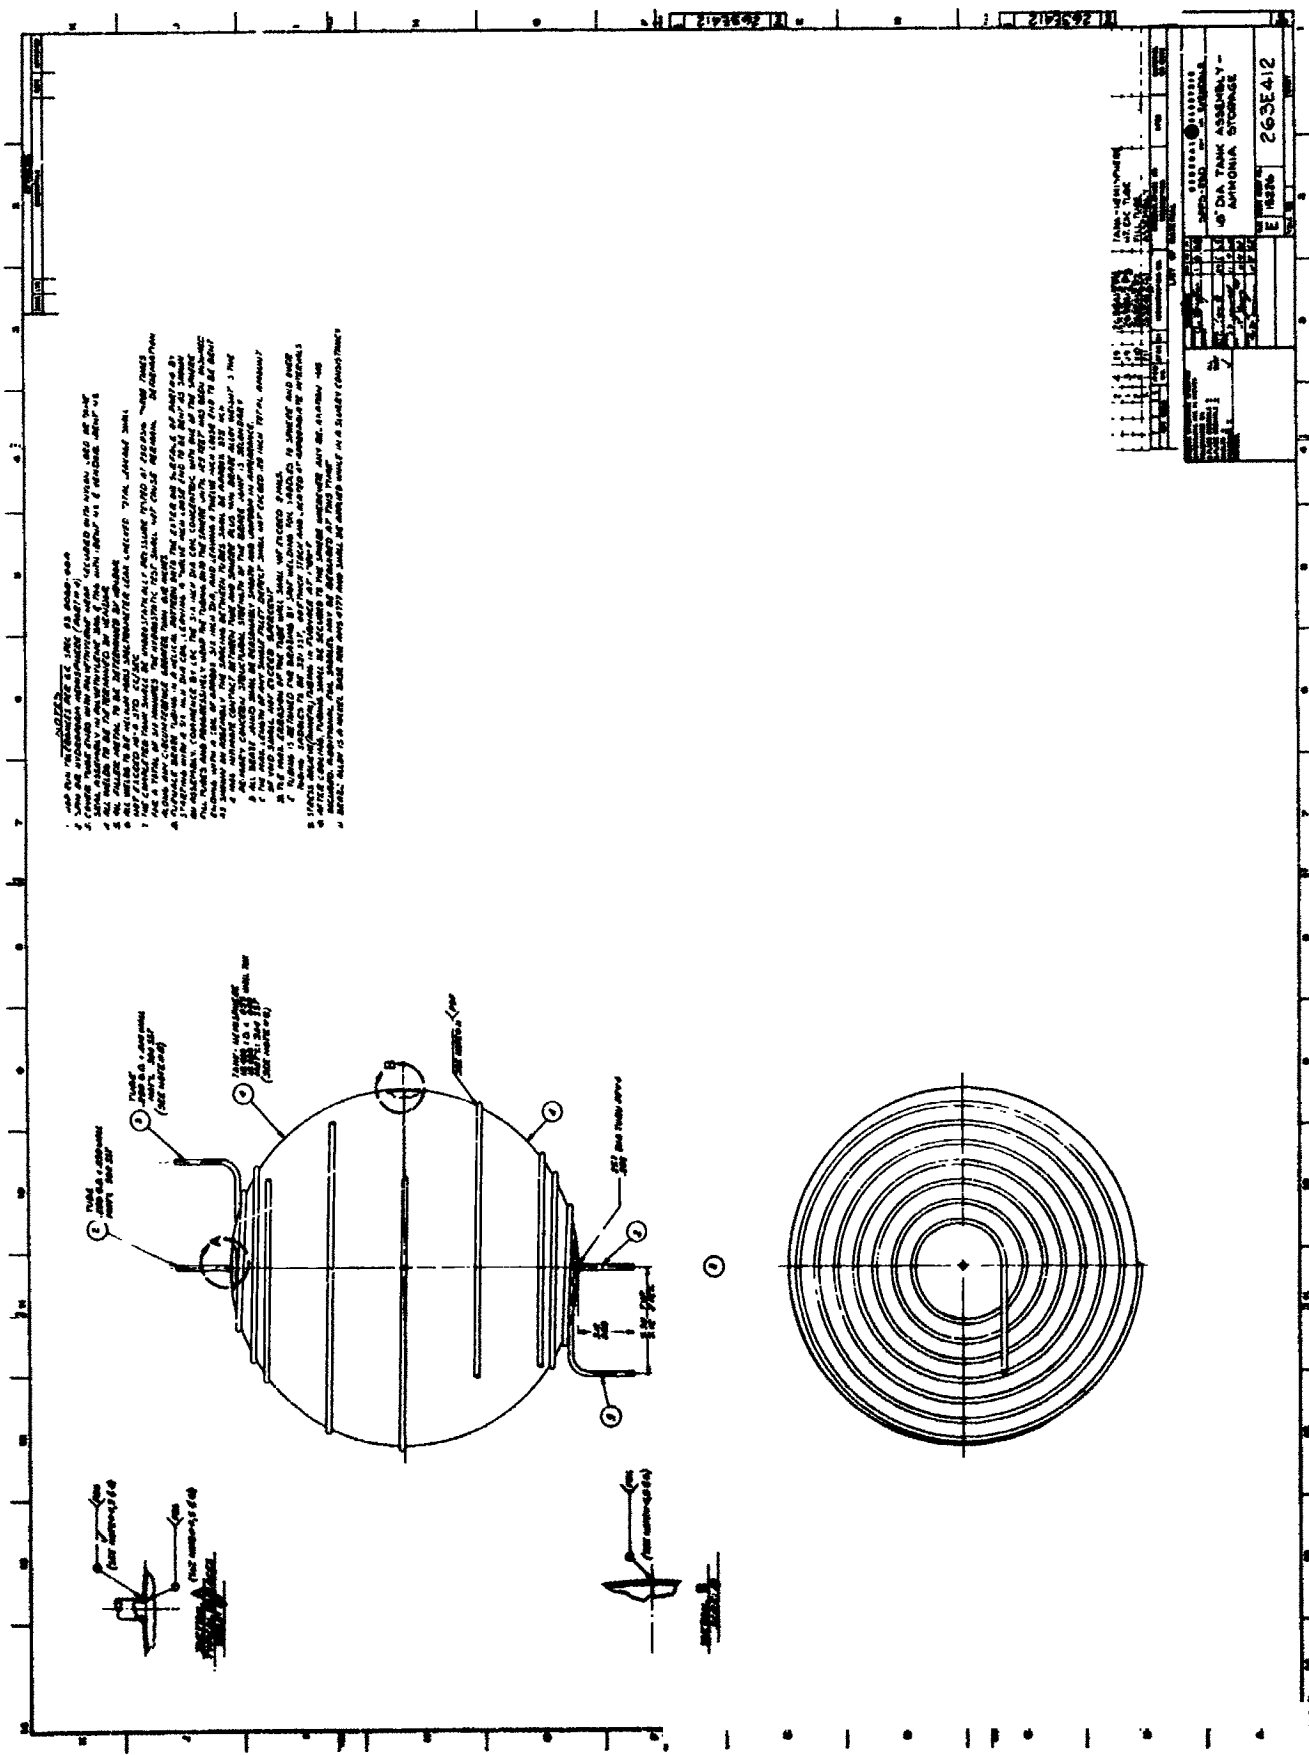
Engineering Drawing of Storage Tank/Heat Exchanger. (Dwg. #263E412)
